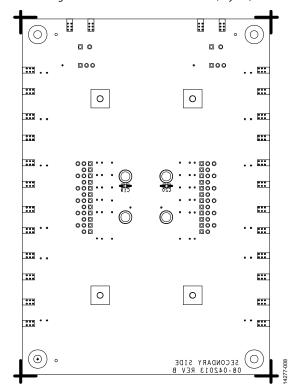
Bottom Layer Assembly and Routing (Layer4)
